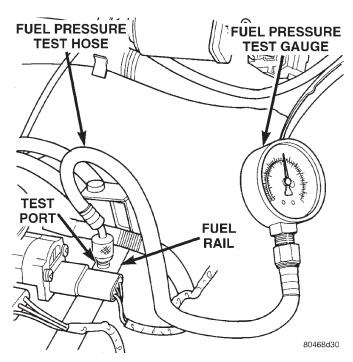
Fuel Pressure Test Port—5.2L Engine—Typical
